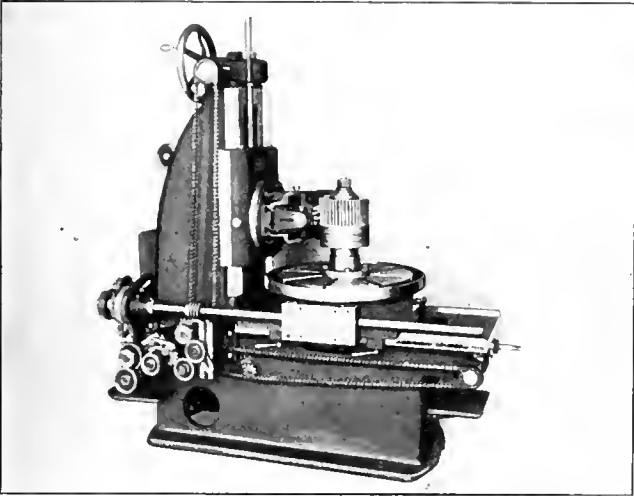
Pfauter Gear-hobbing Machine generating the Teeth on a Stack of Spur Gears
